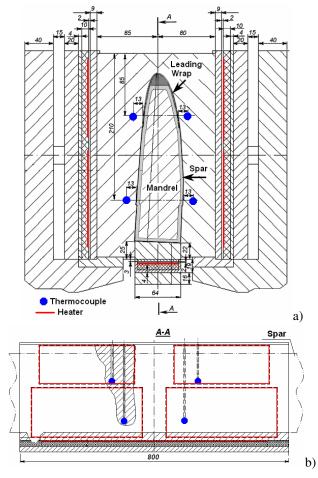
Cross section (a) and longitudinal view (b) on one section of mould for composite spar cure process
